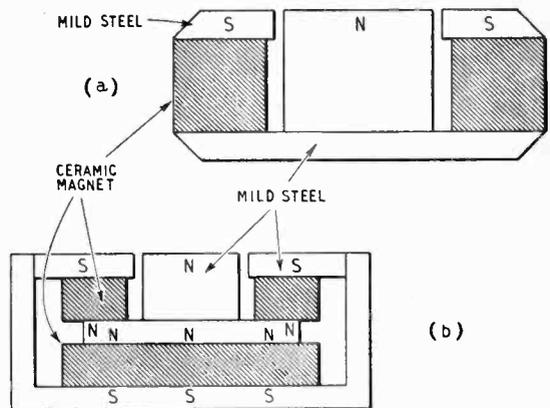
(a) Ring type loudspeaker assembly (b) Pot type assembly.
